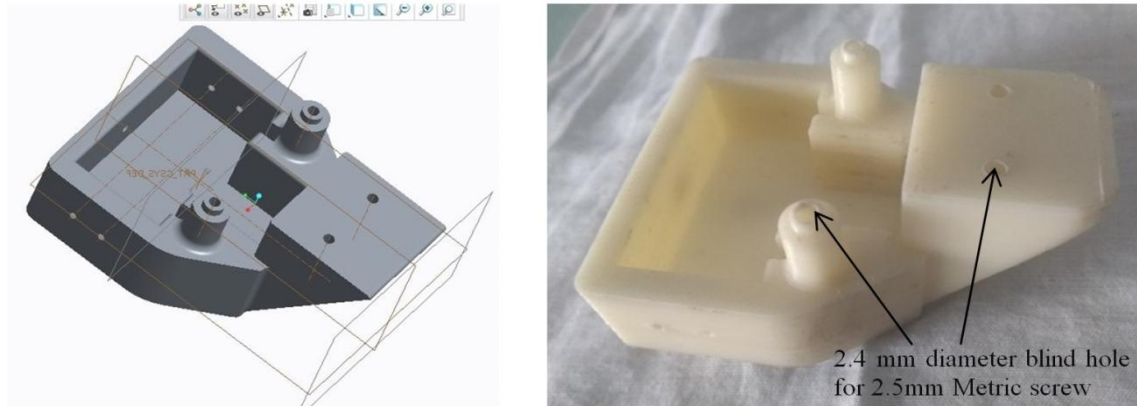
CREO model and 3-D printed gripper body
